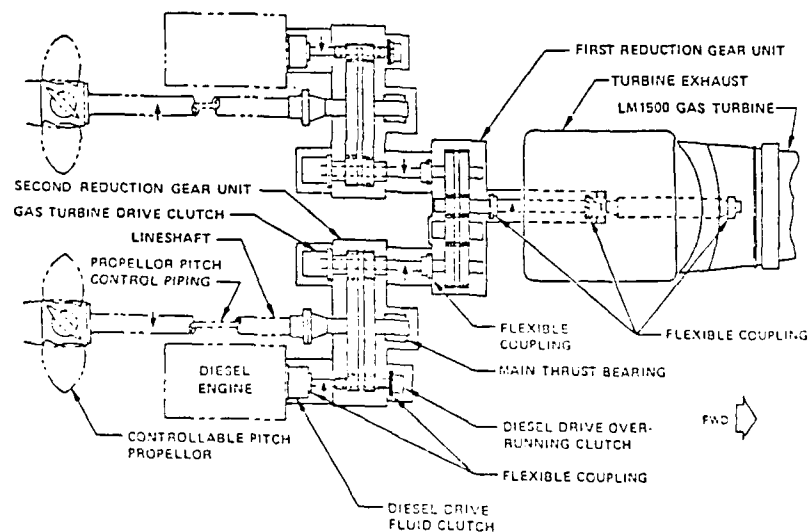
Reduction Gearing, Clutches, Shafts & Propellers
